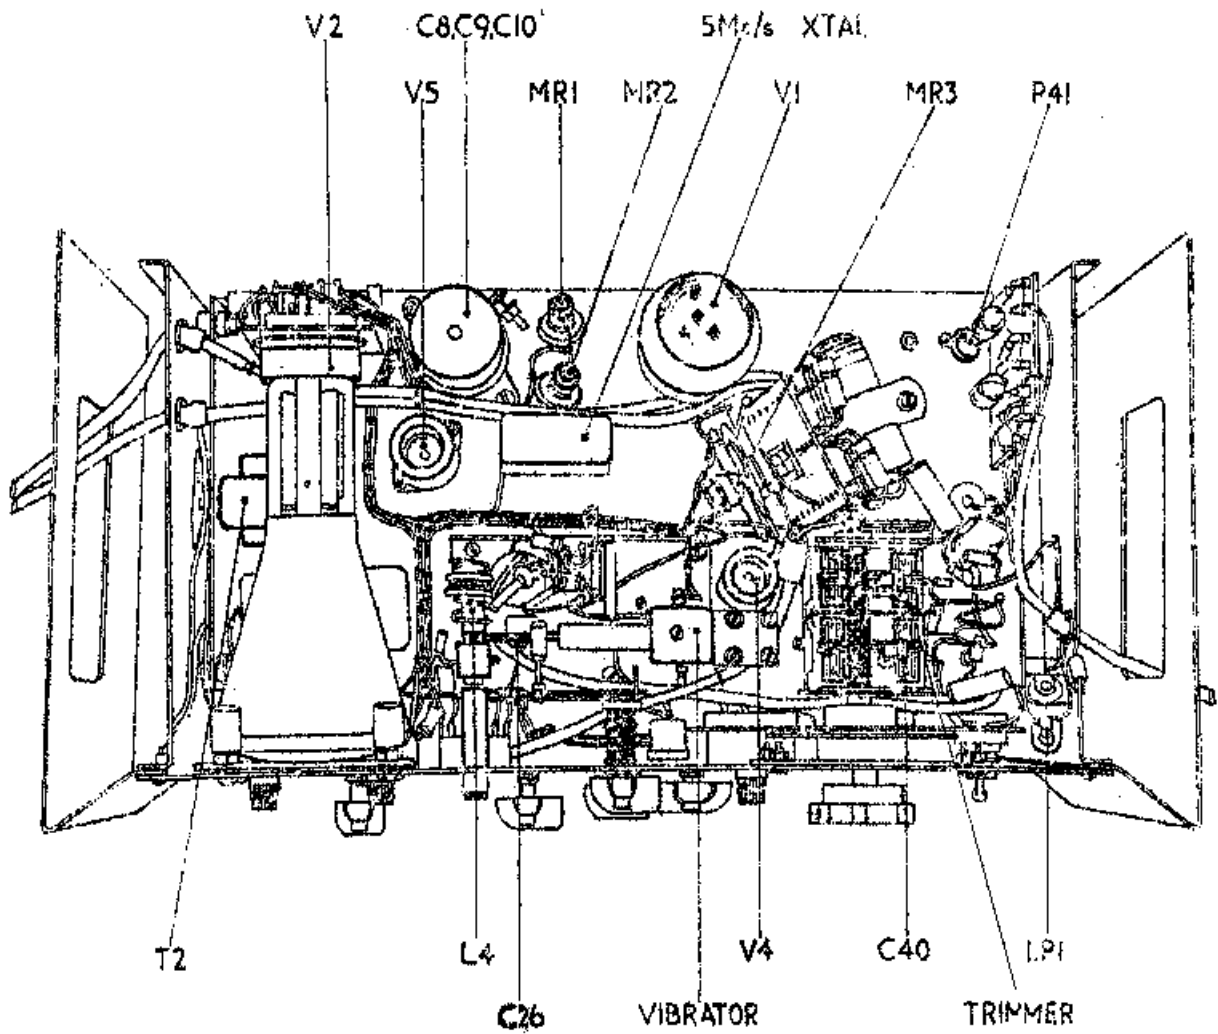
A. TELEVET TYPE 877. CHASSIS - TOP VIEW
